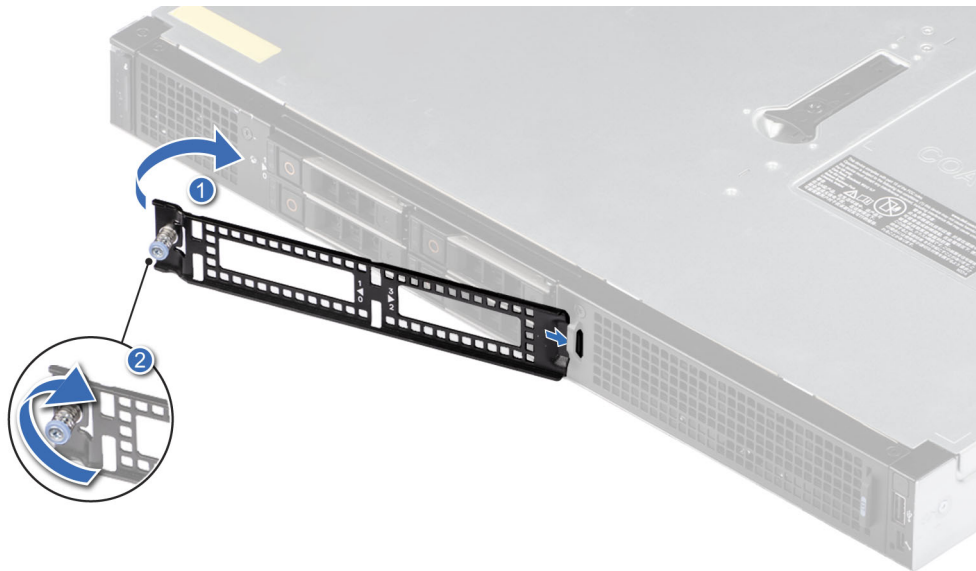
Installing the 901E and MIL 461G drive rugged bracket
